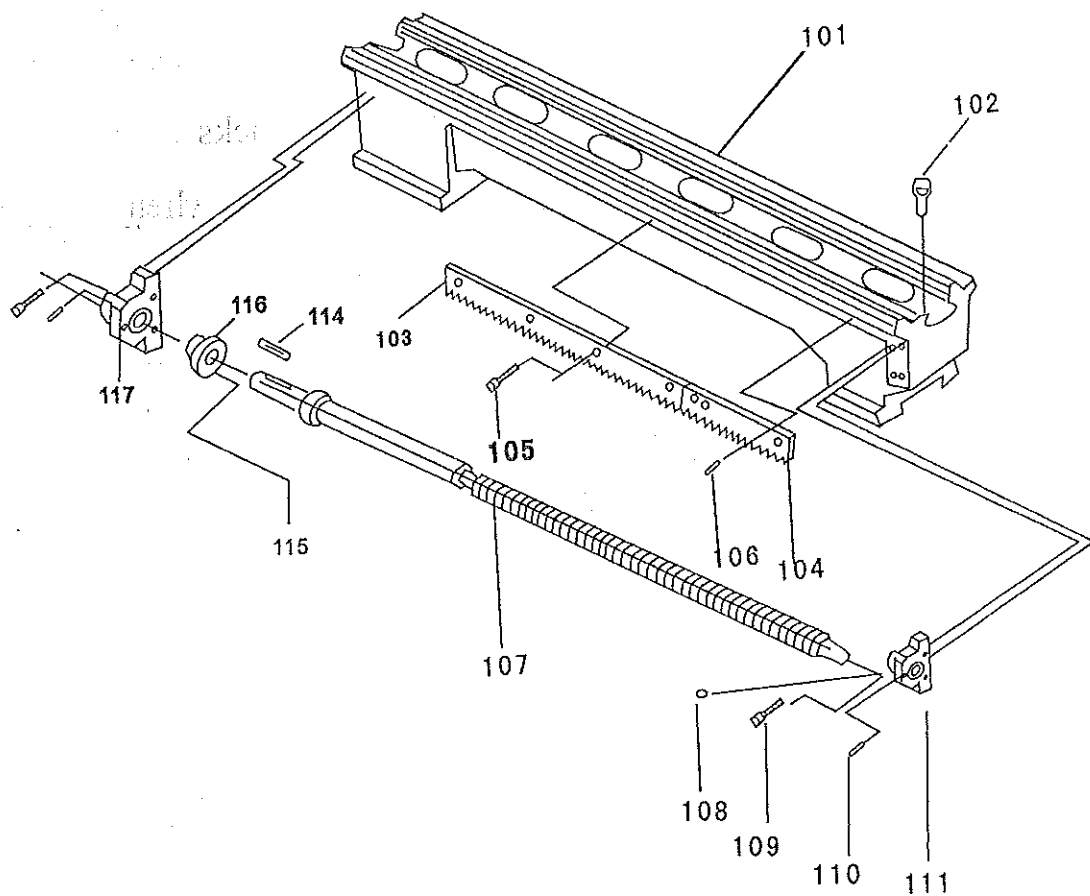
Bed Assembly(CQ6125 With switch lever)
